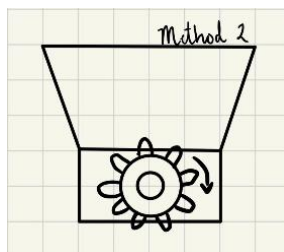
Second method of powder dispensing which utilizes a rotating gear.
